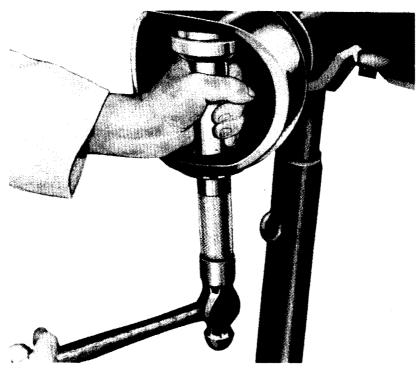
Steering Knuckle Bearing Cup Removal (Driver Head 41-H-1782—Handle 41-H-1074)
